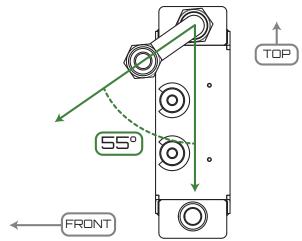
Installation Angle for SFM-10 Adapter Fitting
